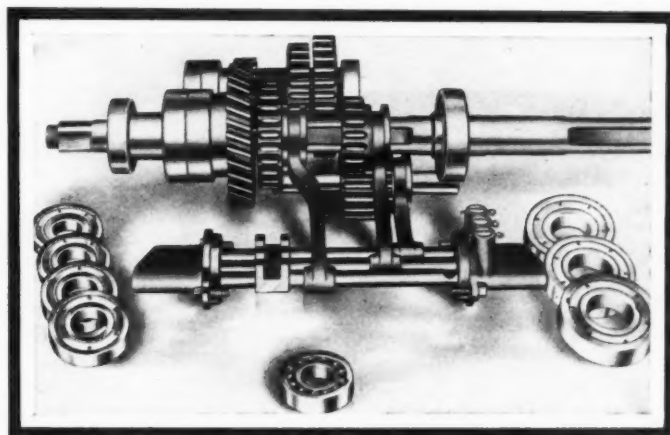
Assembly of Knox gearset showing annular ball bearings
